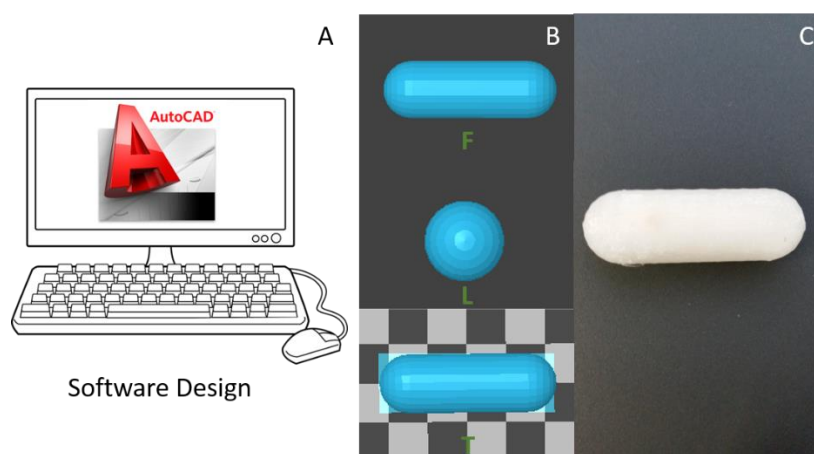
A): CAD design, B): Capsule designed in CAD and C): Capsule printed.
